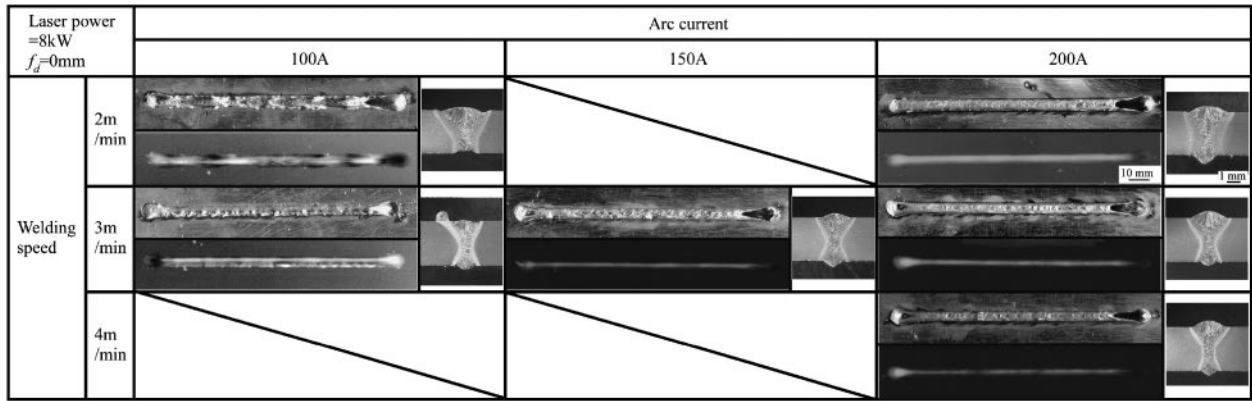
Bead appearances, X-ray radiographs and cross sections of welded joints of 5 mm thick Ti-6Al-4V titanium alloy by single-pass hybrid welding with different arc currents and welding speeds.
